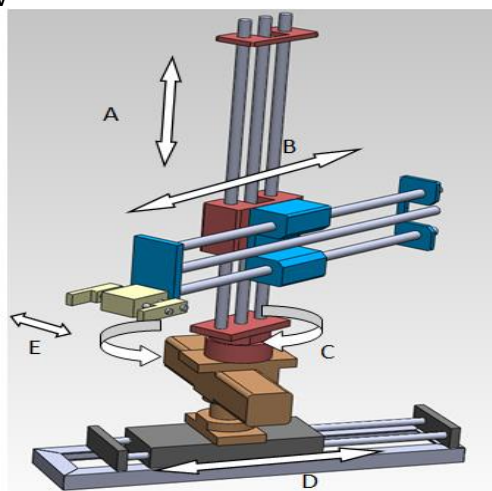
(a) shows the CNC milling machine at home or reference position. Similarly Figure 6.1b shows the manipulator at home position. At this state, the automatic cycle is enabled. When the automatic cycle started, the first step will be opening CNC machine glass slide doors and followed the complete sequencing control system for manipulator and workpiece pneumatic clamping fixture that mounted on CNC milling machine bed.
